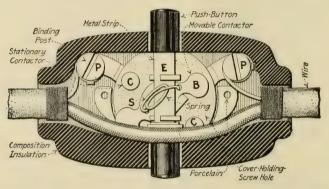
Top view, with cover removed, of tandem, two-button, single-pole, "feed-through" or straight-through snap switch. (Beaver Machine & Tool Co.)
